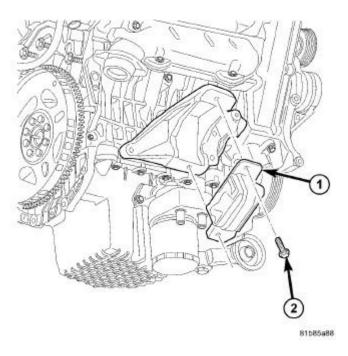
Right Engine Mount & Bolts Courtesy of CHRYSLER LLC
